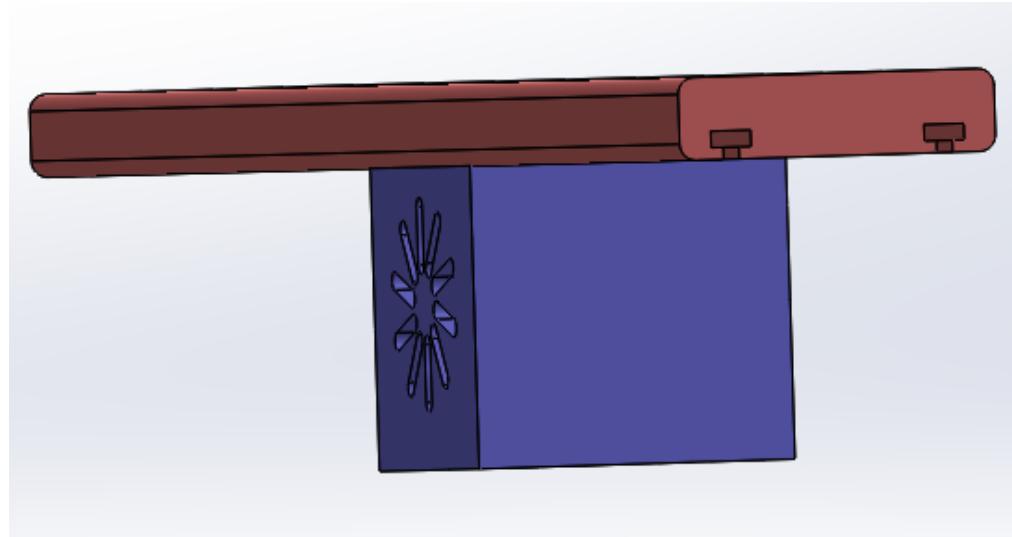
Ferrarer, Auston: Assembly Step 2
